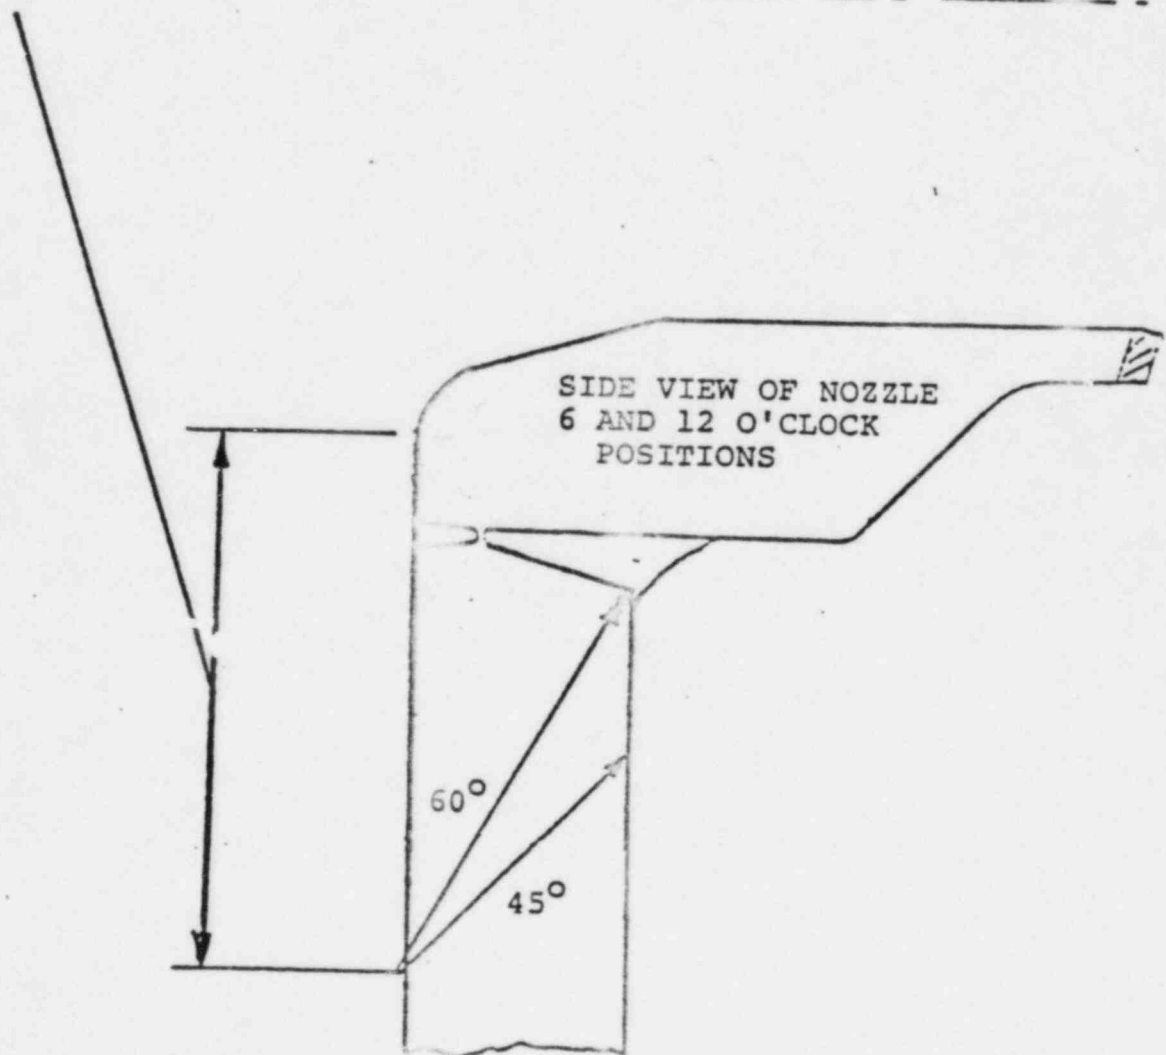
ILLUSTRATION SHOWING ANGLE BEAM COVERAGE FROM INSIDE THE VESSEL ON THE NOZZLE-TO-VESSEL WELD
